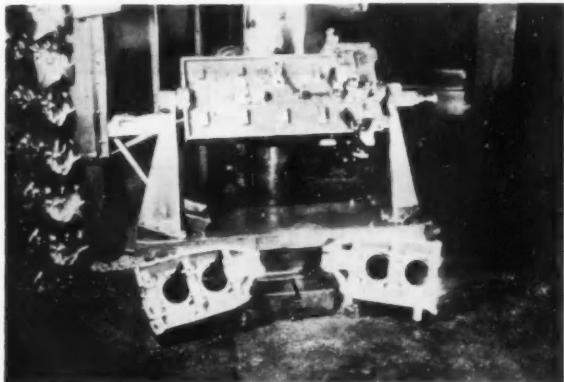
Trunnion fixture on radial drill for drilling and reaming locating and dowel holes in crankcase.
